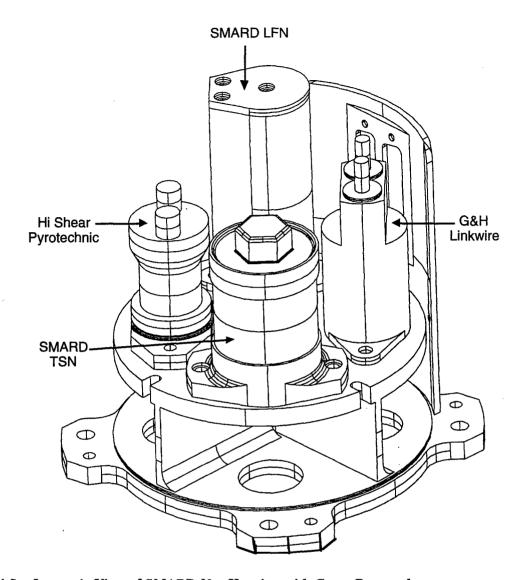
Isometric View of SMARD Nut Housing with Cover Removed.
